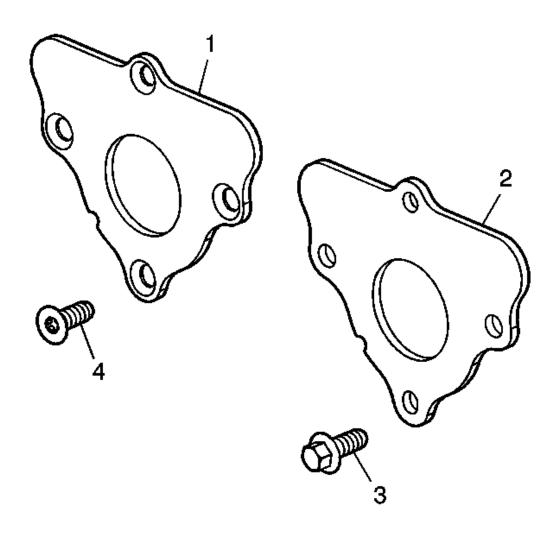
Identifying Camshaft Retainer Bolts Courtesy of GENERAL MOTORS CORP.
